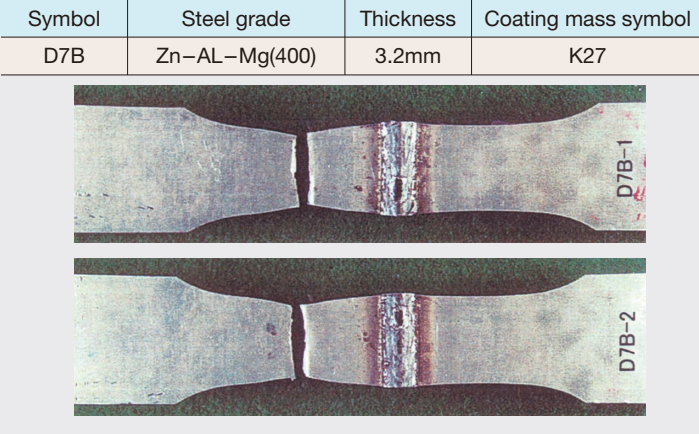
Fracture Conditions in Tension Tests for Lap Fillet Weld Joints (thickness: 3.2 mm)
